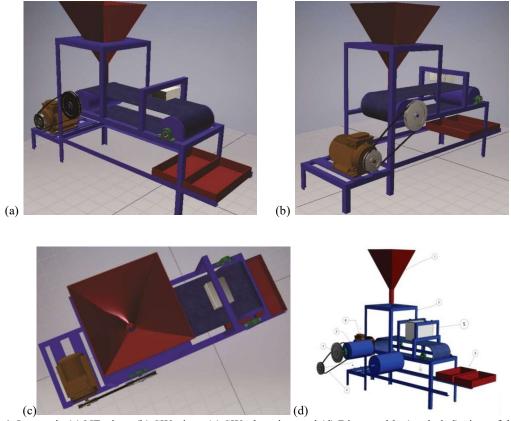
Isometric (a) NE-view, (b) SW-view, (c) SW-plan view and (d) Disassembly (exploded) view of the separator
